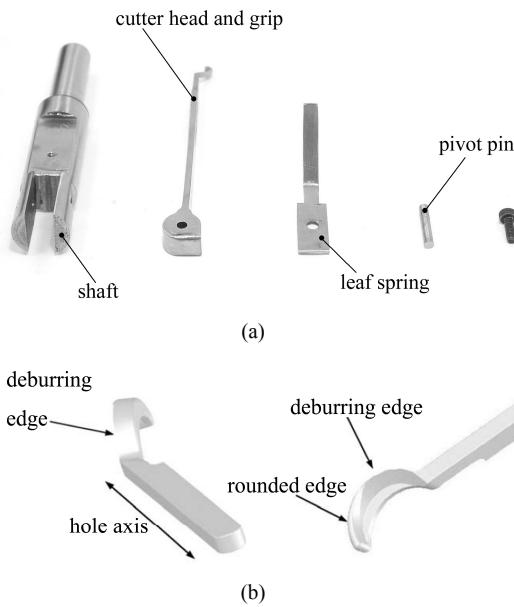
The second design of the deburring tool [9]: (a) components, (b) details of the cutter head.
